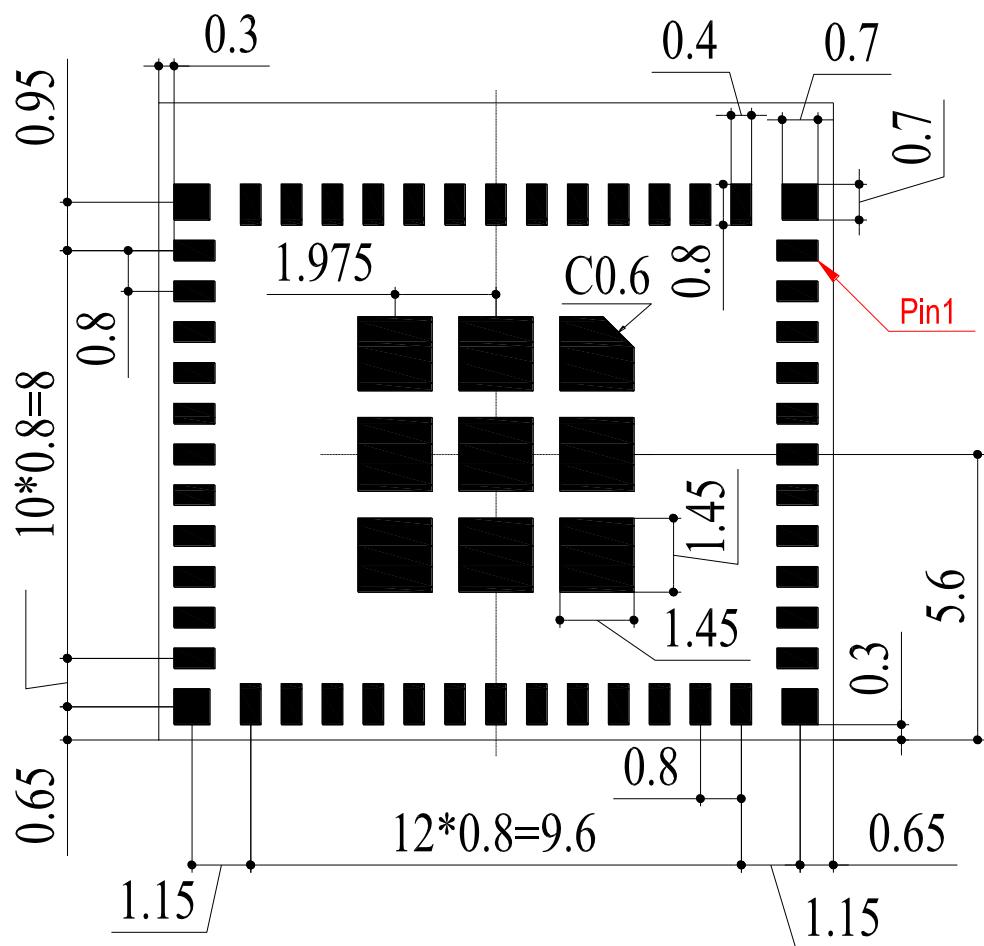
FGM842D Bottom Dimensions (Bottom View)
